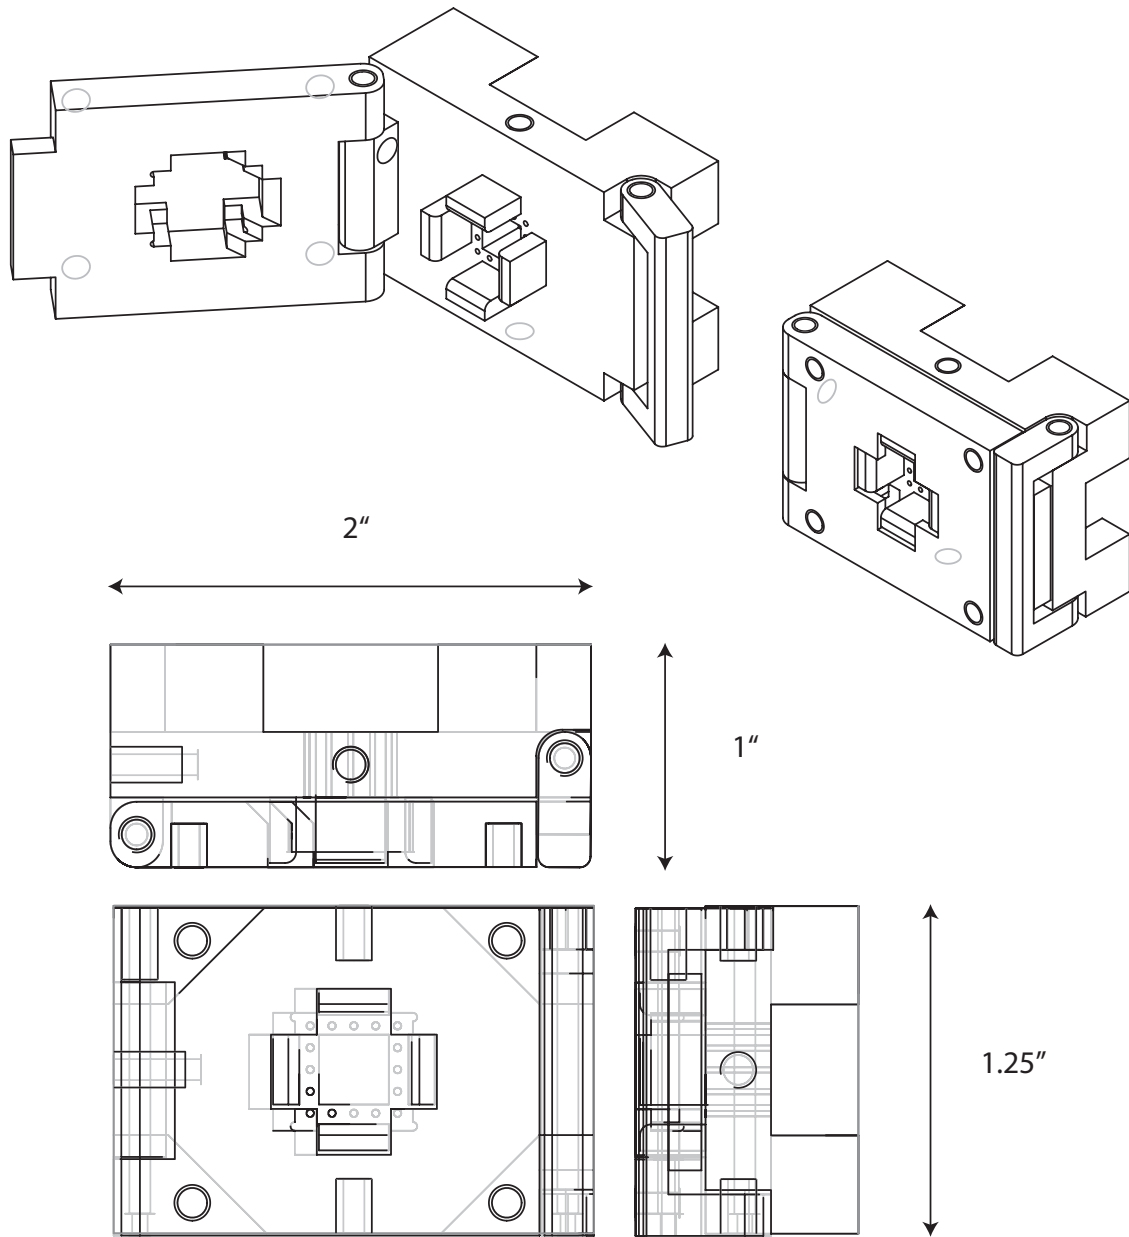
Drawings of the probe fixture used to test photodetectors on half-inch substrates.
